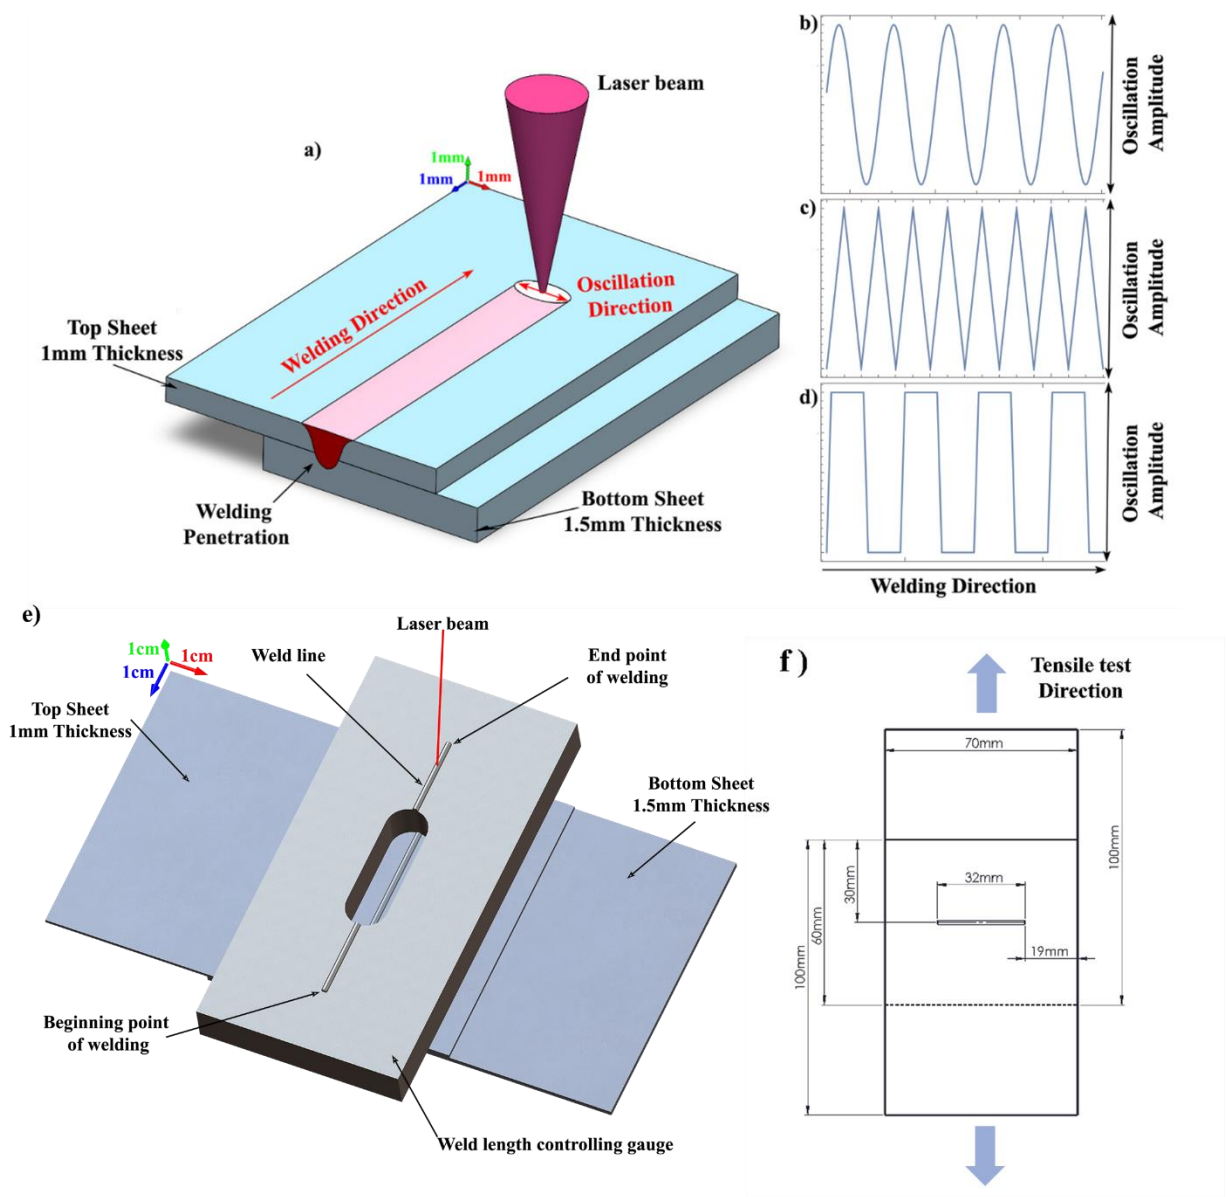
Schematic of a) joint configuration and oscillation patterns, including b) sinusoidal pattern, c) triangular pattern, d) rectangular pattern, e) laser welding process setup, and f) sample dimension and direction for tensile test
